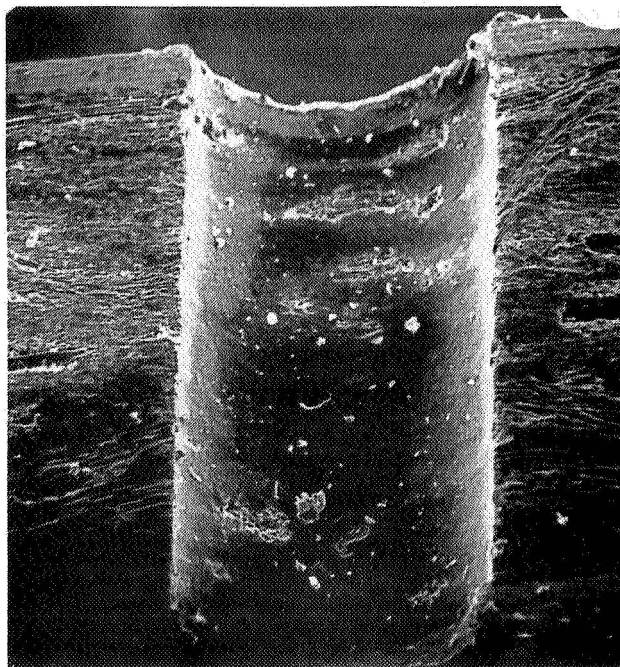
SOLDER PAD CONDITION AFTER DRILLING (4X)
